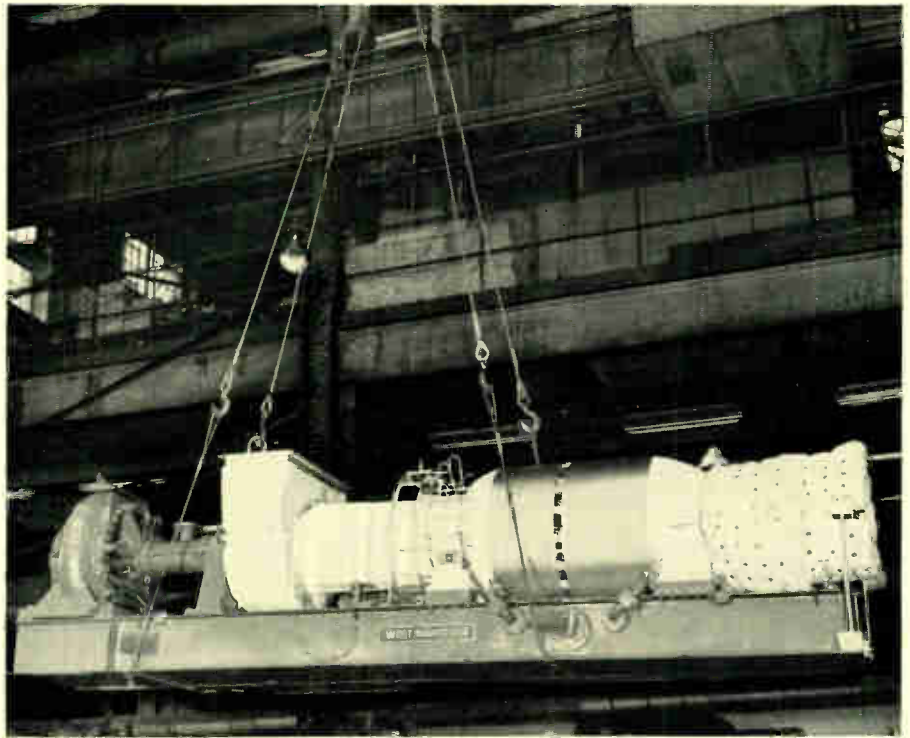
The complete in-line gas-turbine unit, mounted on a single bedplate. Shown left to right: the single-stage centrifugal booster, air inlet, axial-flow compressor, combustors, turbine, and exhaust. The total unit weighs but 26 000 pounds and is 20 feet long.
